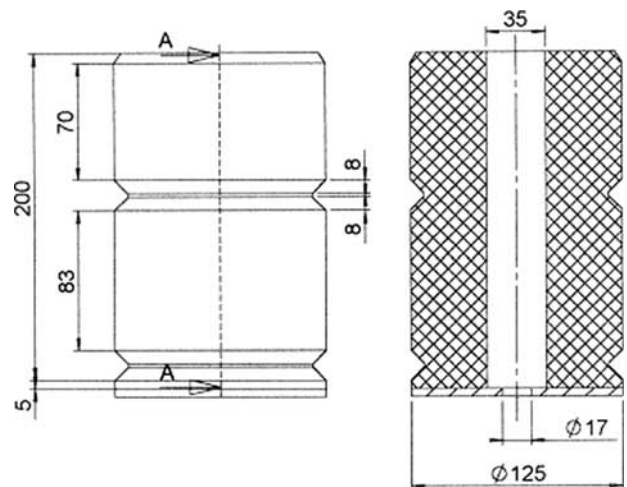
Scheme of the buffer shock absorber including its geometrical dimensions.
